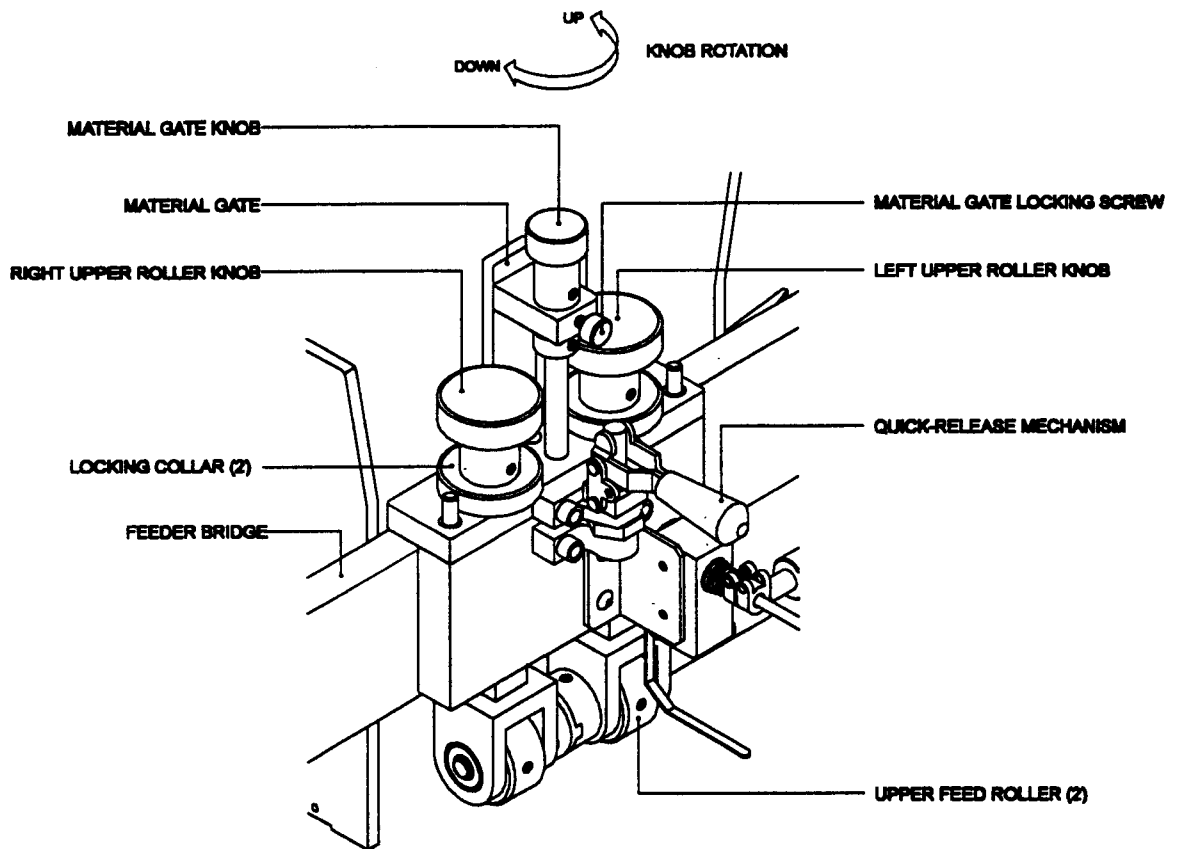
Feeder material gate/ upper feed roller details indicating adjustment points located on the feeder bridge assembly.
